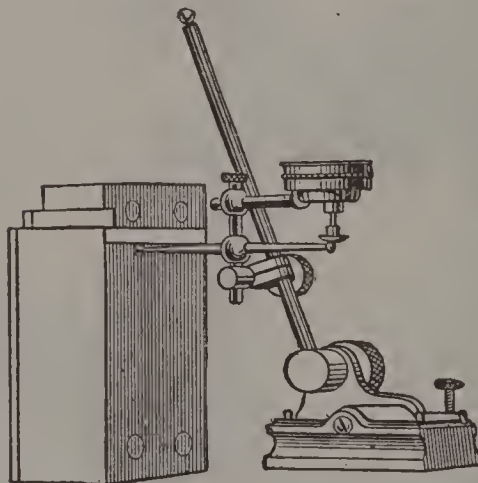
INDICATOR USED WITH SURFACE GAGE ON BENCH PLATE
